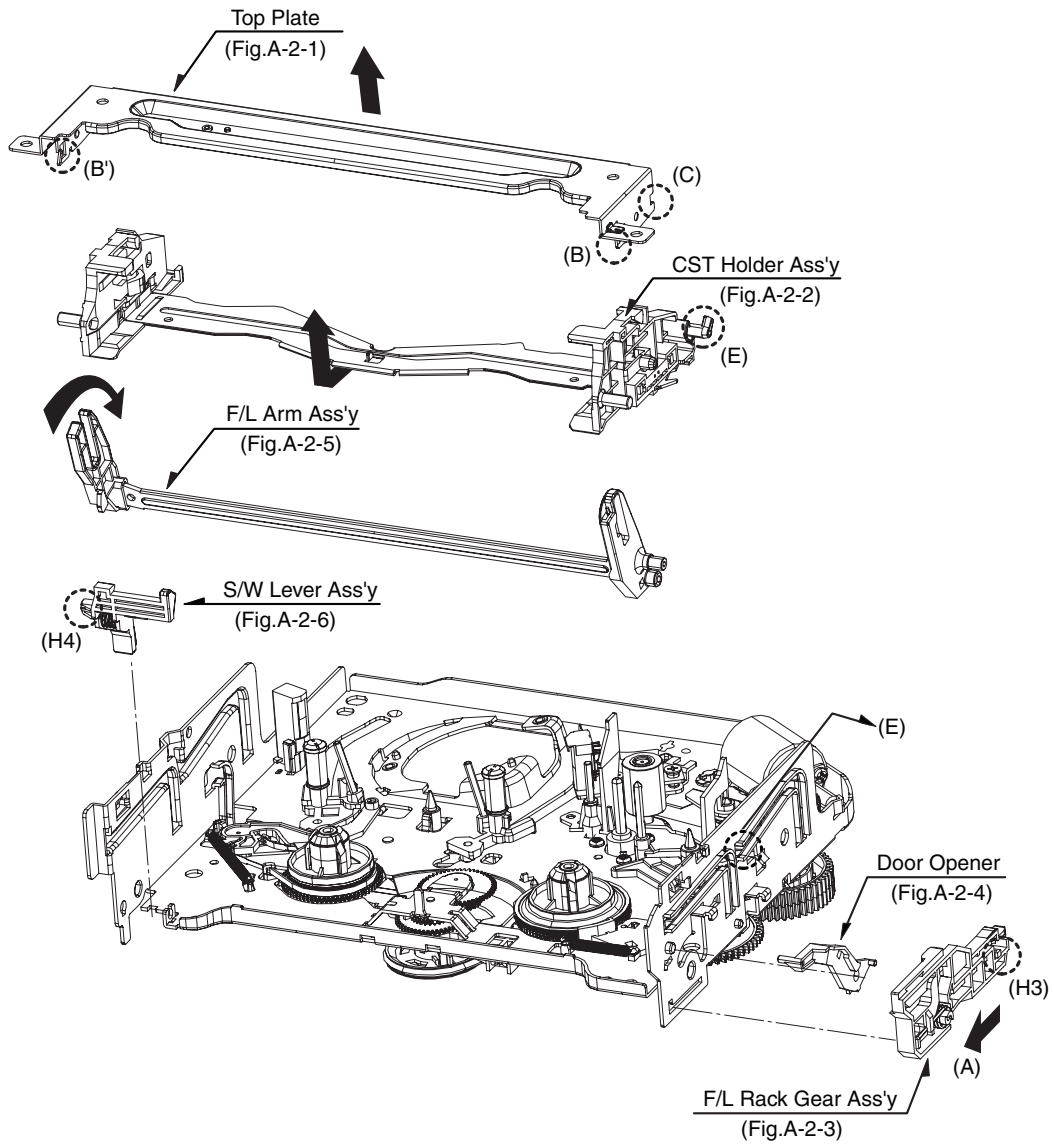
Top Plate, CST Holder Ass'y, F/L Rack Gear Ass'y, Door Opener, F/L Arm Ass'y, S/W Lever Ass'y
